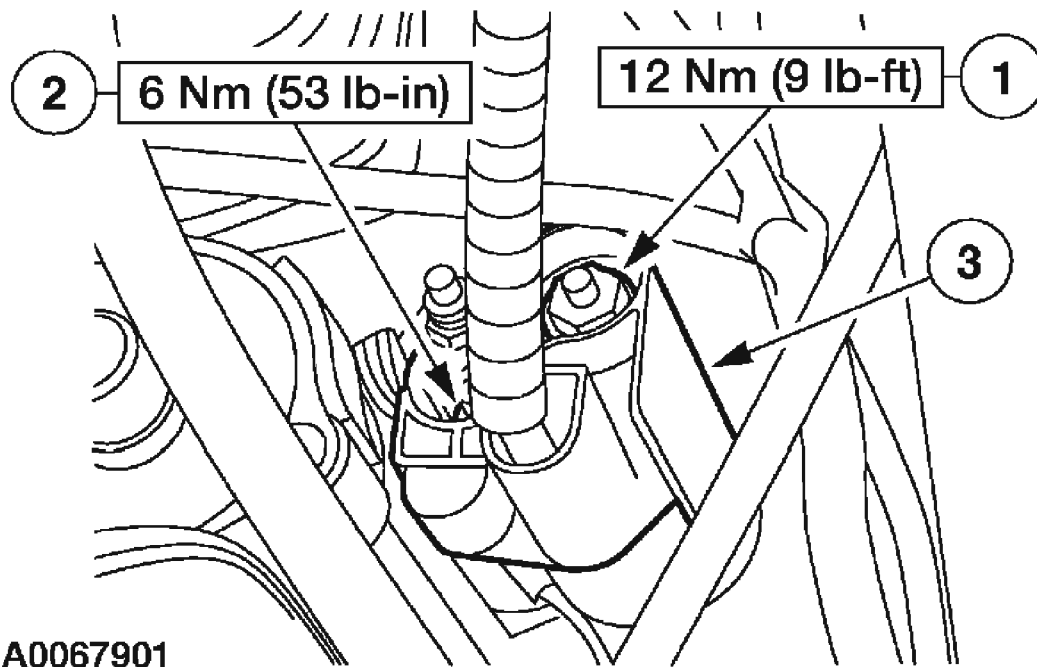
Disconnecting Starter Motor Electrical Connectors
